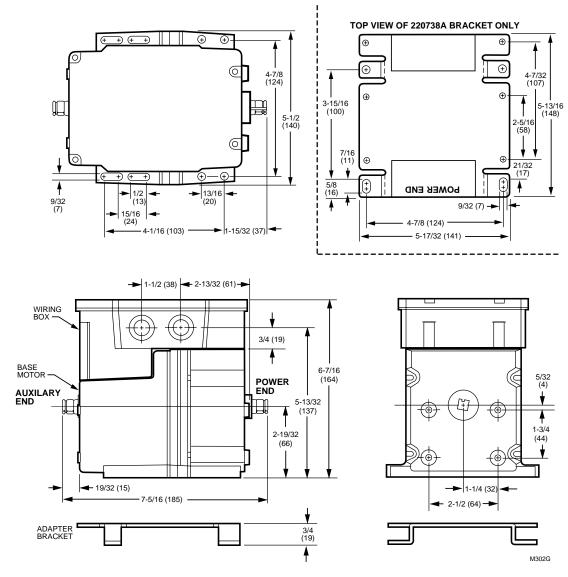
M6284, M6294 mounting dimensions in in. (mm). Note: M6281 does not have auxiliary shaft. All other dimensions are the same.
